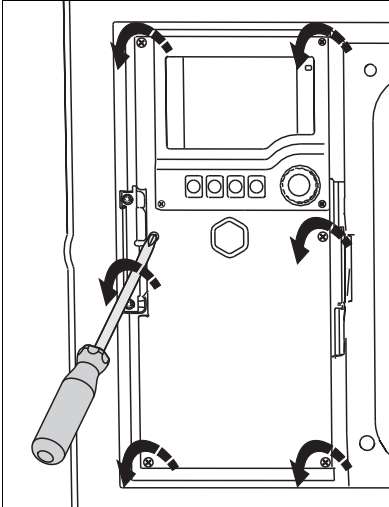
Release 6 housing screws with a Phillips screwdriver to open the display cover
